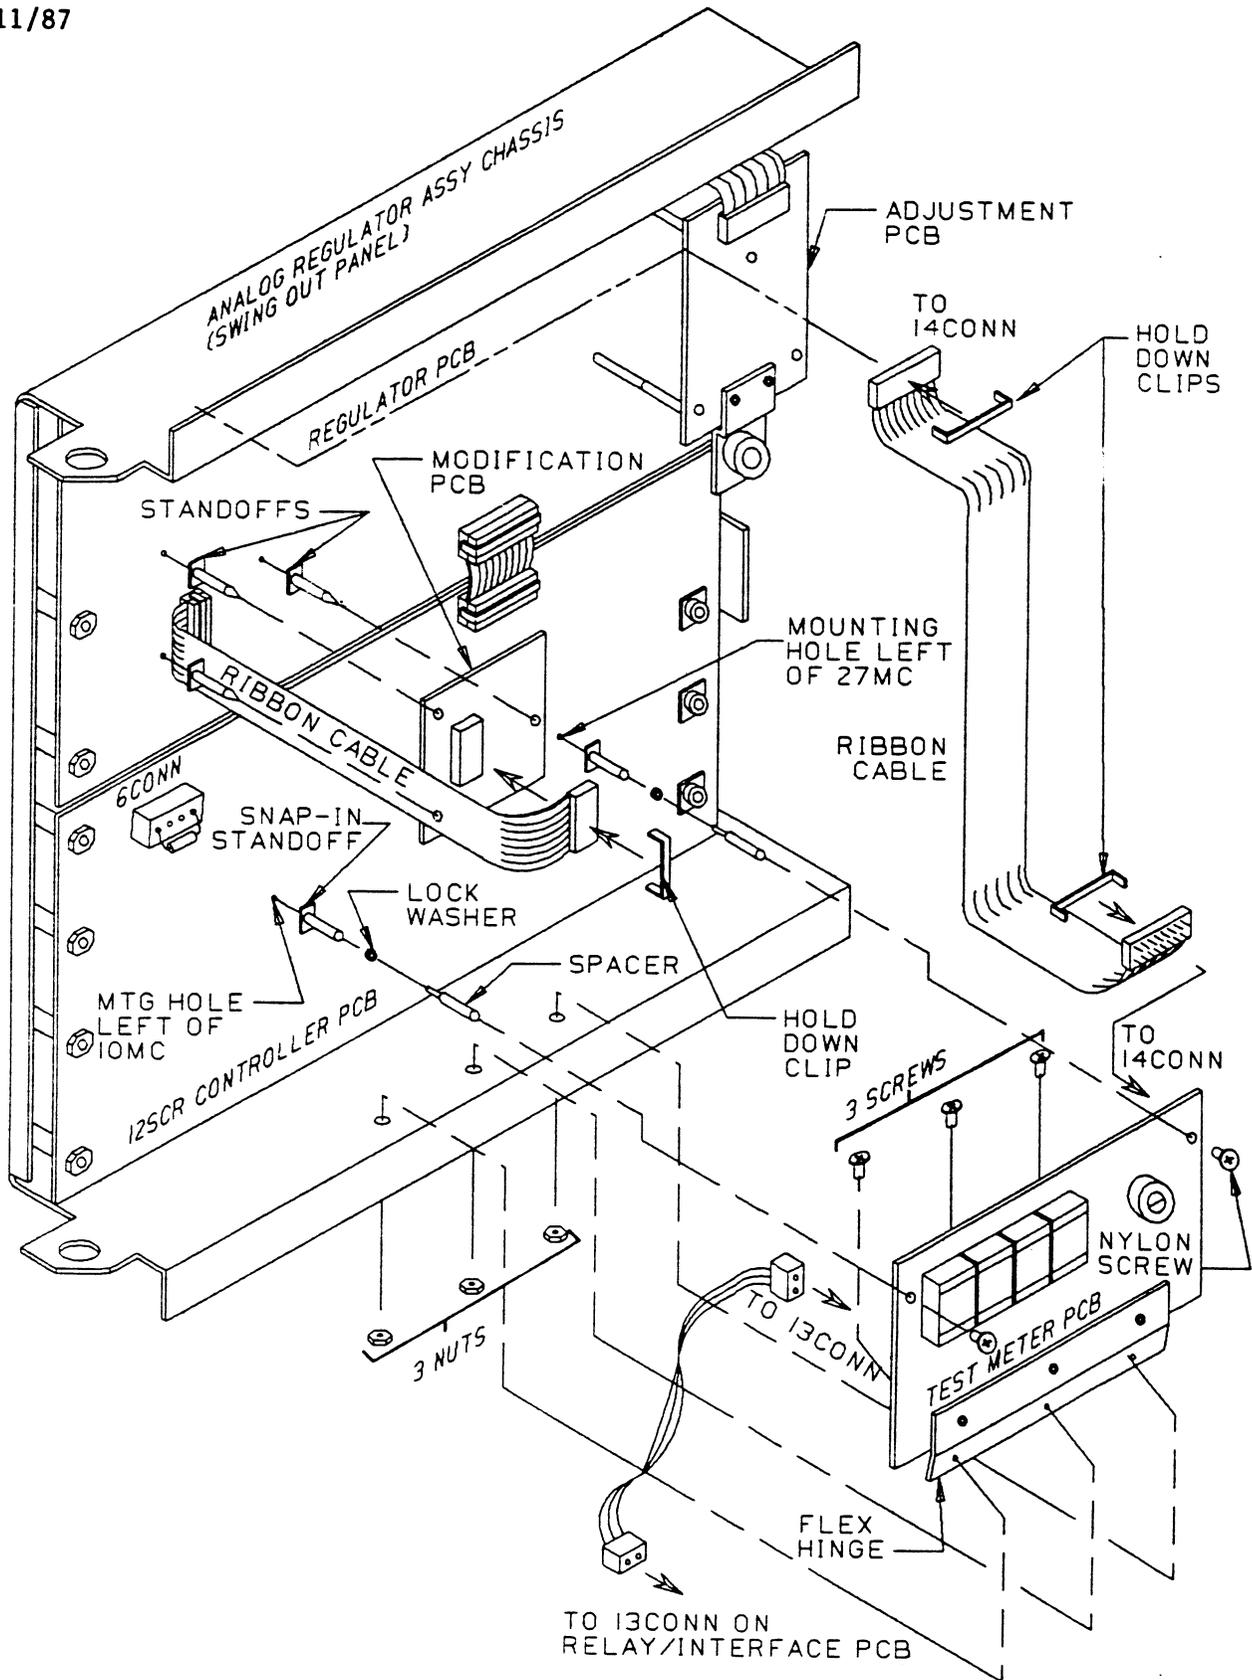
Mod Kit Installation on Analog Regulator Assembly
